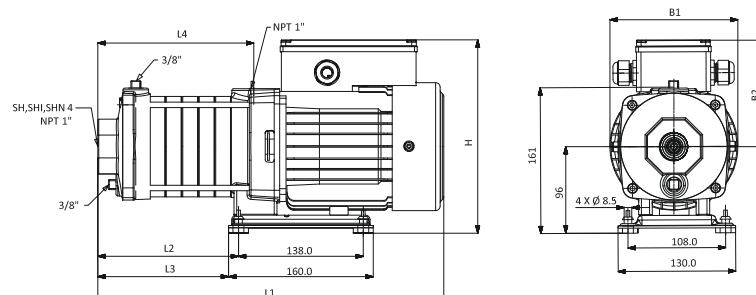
Dimensional sketches, SH,SHI,SHN-4 with SMG 71/80 Motor
